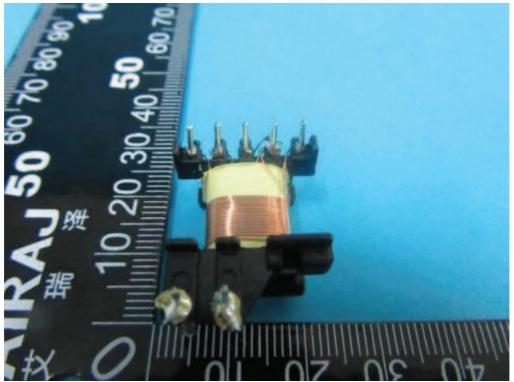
Detail view of transformer (for 90E12PU05-xxxx)
